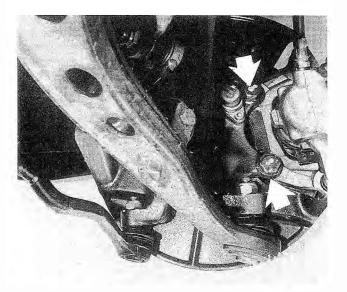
Front brake caliper mounting bolts (arrows). Right (passenger) side shown.
